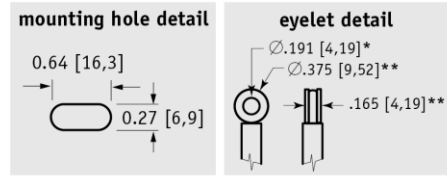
Outline Drawing (36 oz. cable tension only)
